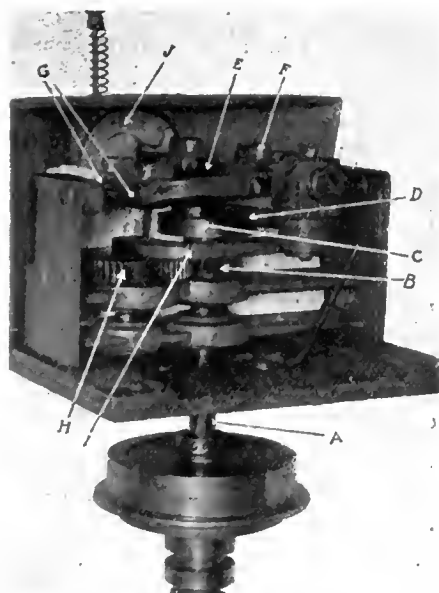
MECHANISM OF LENS GRINDING MACHINE
